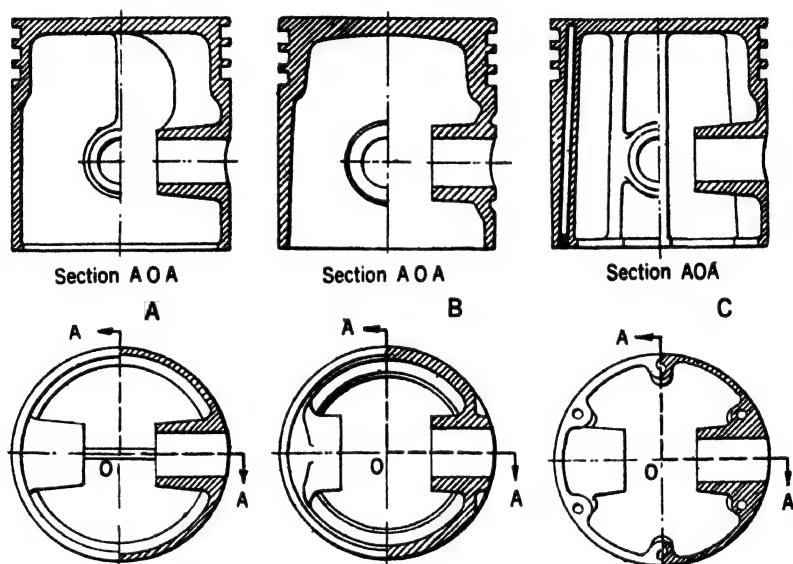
Sectional Views of Early Alloy Pistons Employed in Automotive Engines. A—Simple Trunk Type. B—Trunk Type Relieved at Wristpin Boss. C—Trunk Type with Drilled Heat Conducting Vertical Bosses Extending from Head to Skirt.
